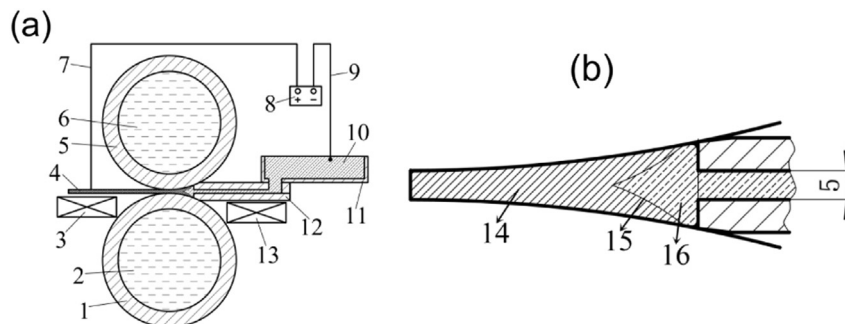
(a) Schematic diagram of electromagnetic TRC and (b) the roll-casting zone: 1-lower roller; 2 and 6-cooling water; 3 and 13-coil; 4-7075 sheet; 5-upper roller; 7 and 9-PEF wire; 8-pulsed power supply; 10 and 16-7075 melt; 11-sluice; 12-nozzle; 14-solidified alloy; 15-solidification interface.
